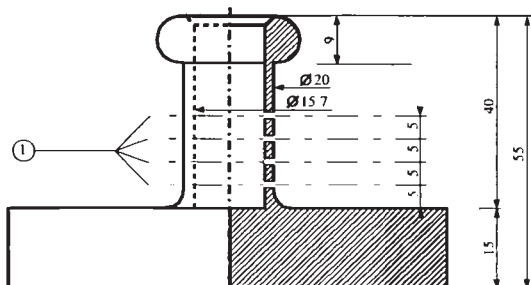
Hollow bronze cylinder, closed at one end; Plan and cut dimensions in mm
